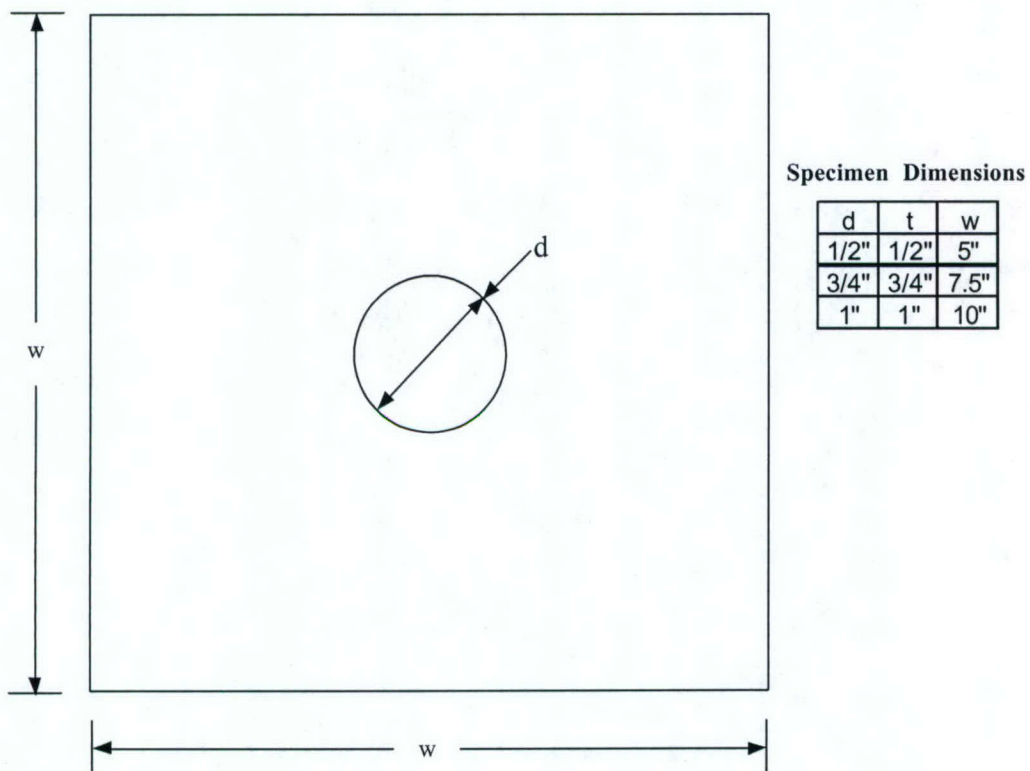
Single Bolt Test Specimen and Fixture Schematic
